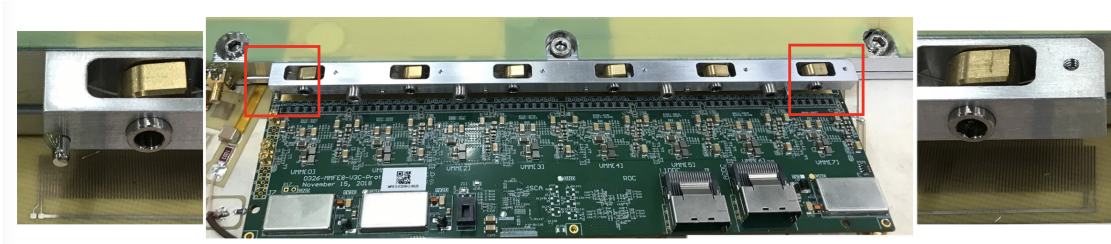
The MMFE8 placed on Large Sector, PCB 2, Left side and Layer 1 (Eta).
